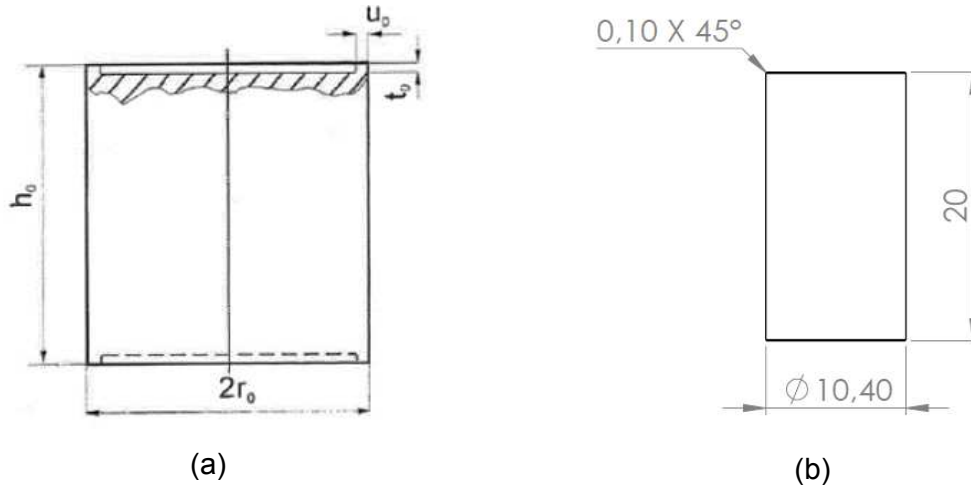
Sample geometries used (a) for compression testing – Rastegaev specimen, (b) cold heading testing
